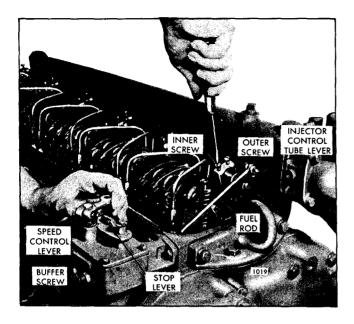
Positioning No. 1 Injector Rack Control Lever (Two Screw Assembly)
